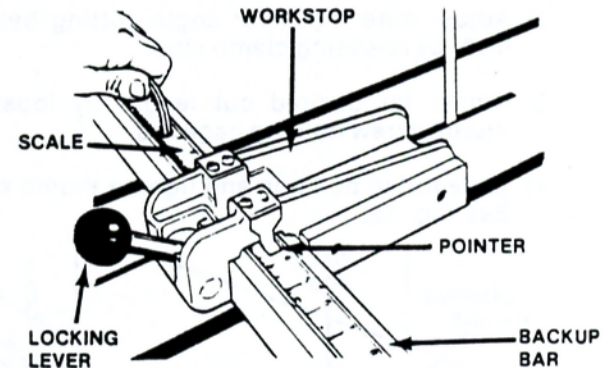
UNIVERSAL CALIBRATED WORK FIXTURE SET UP FOR STRAIGHT CUT-OFF.
